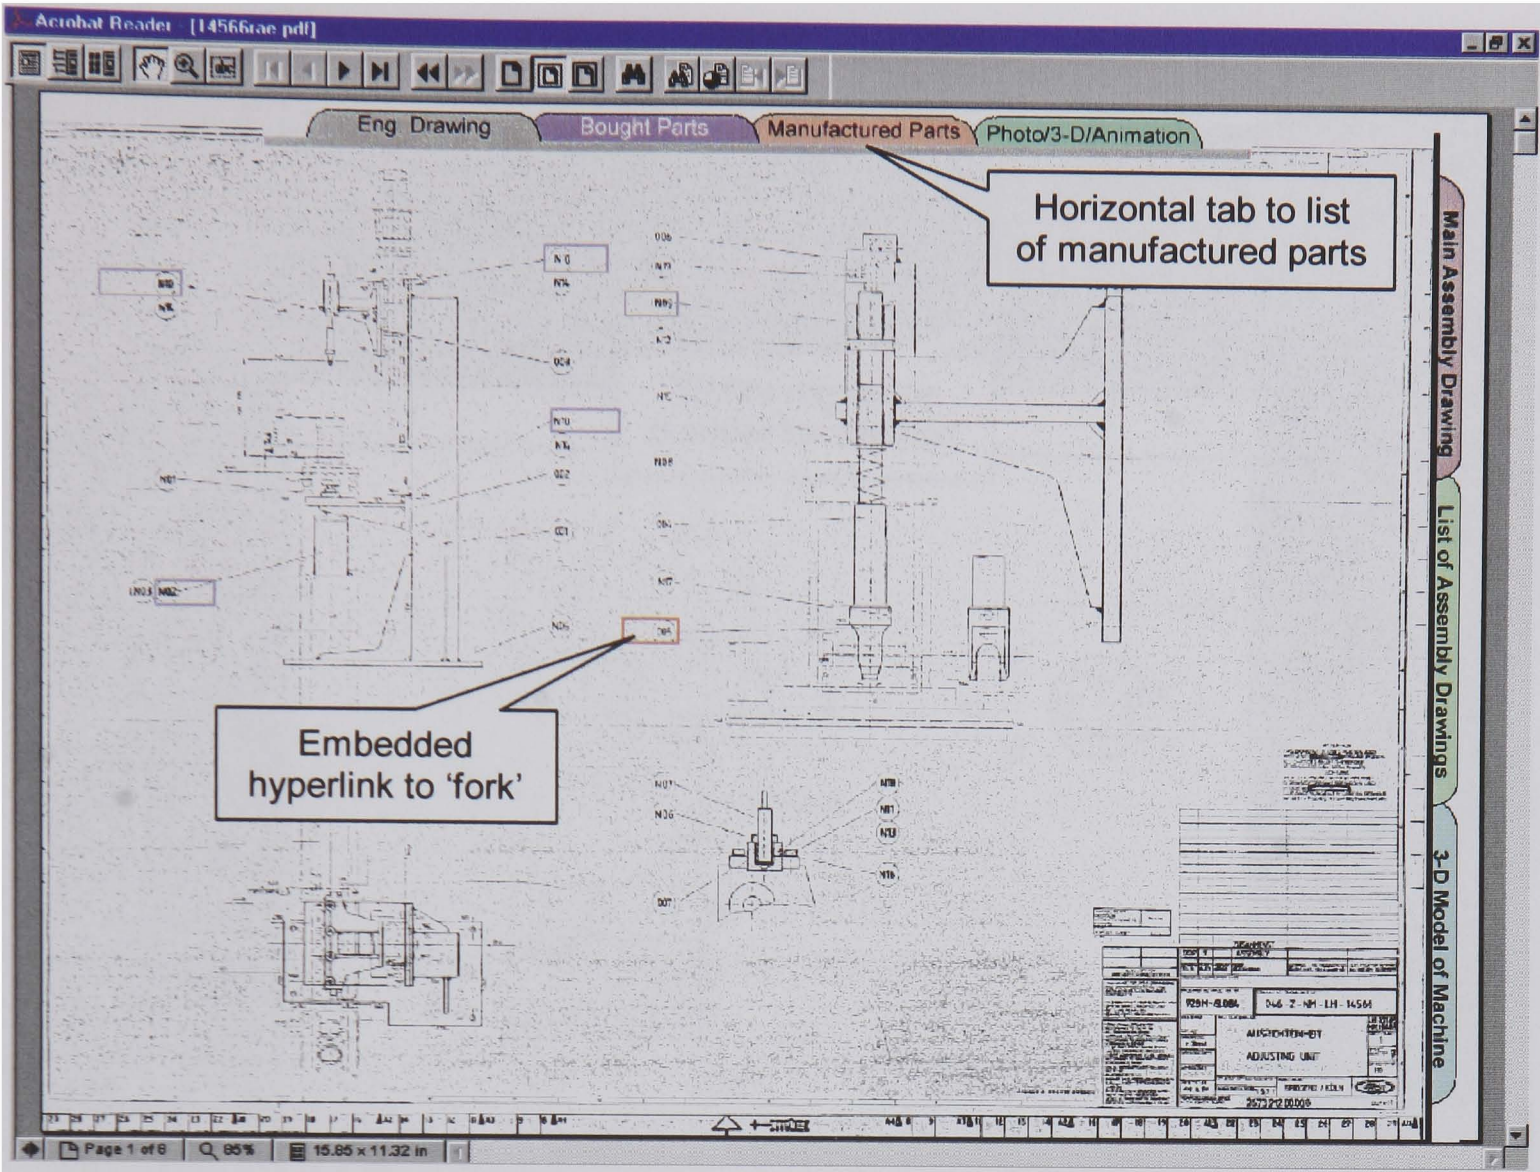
Sub-assembly drawing showing links to piece parts and horizontal tabs
